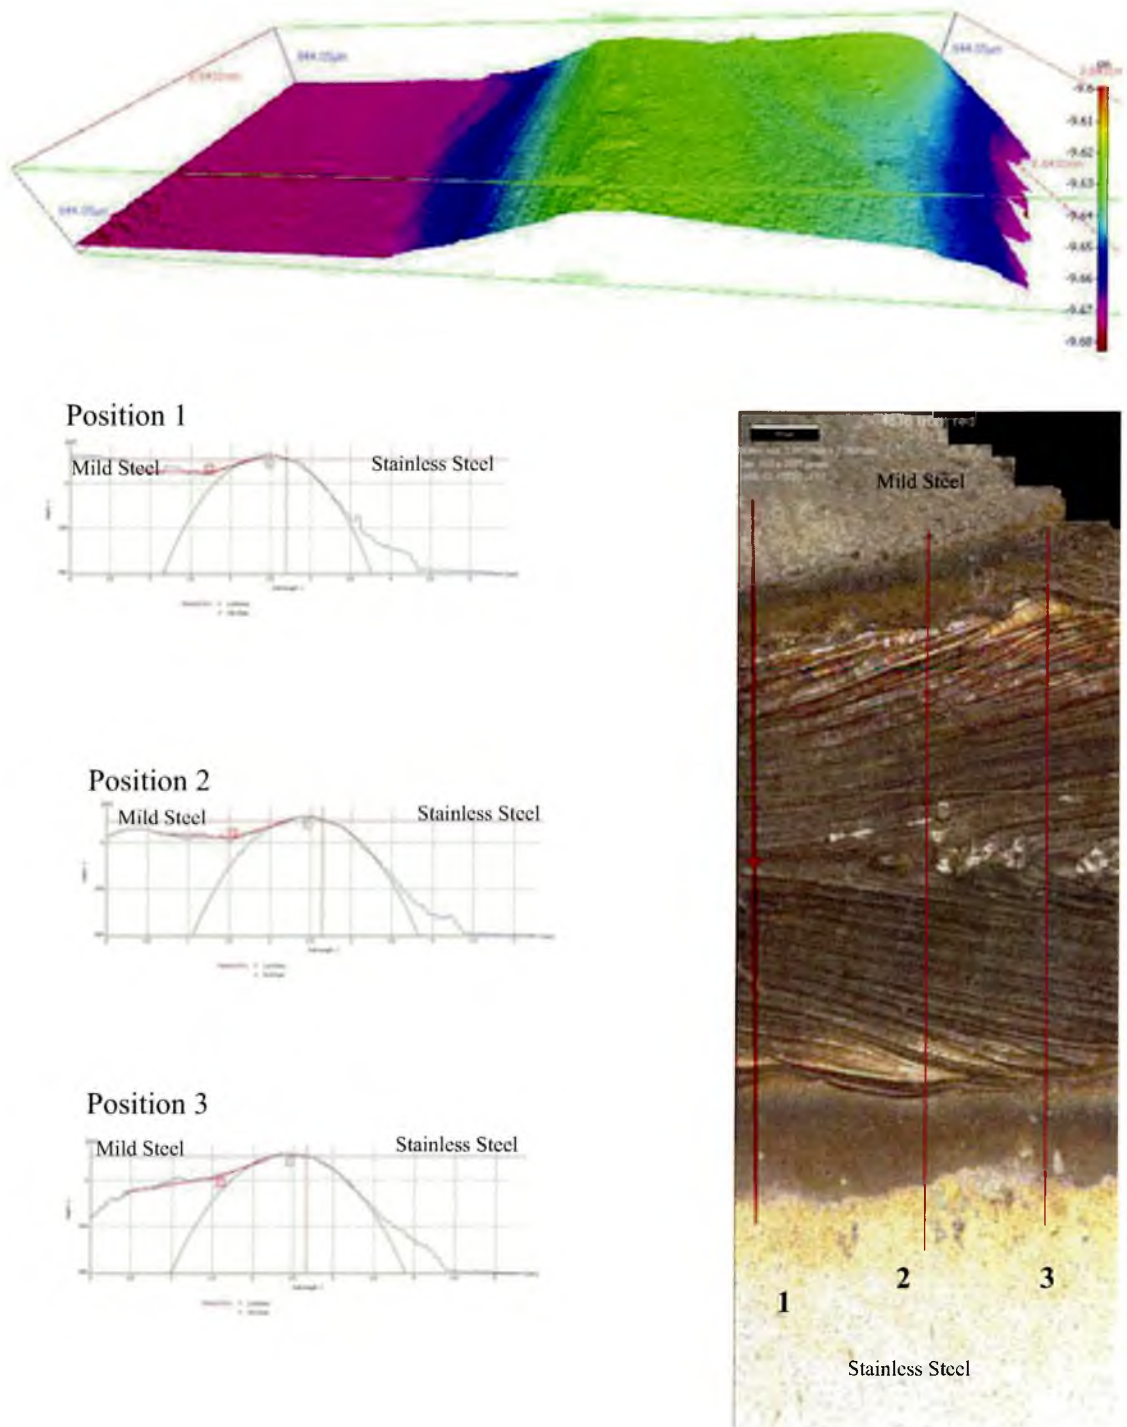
IFM 3D surface image and surface profiles for the front of the weld bead of sample F8.7.6
